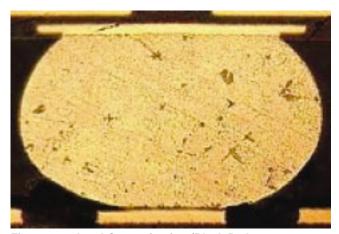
Land Contamination (Black Pad or Soldermask Residue)
